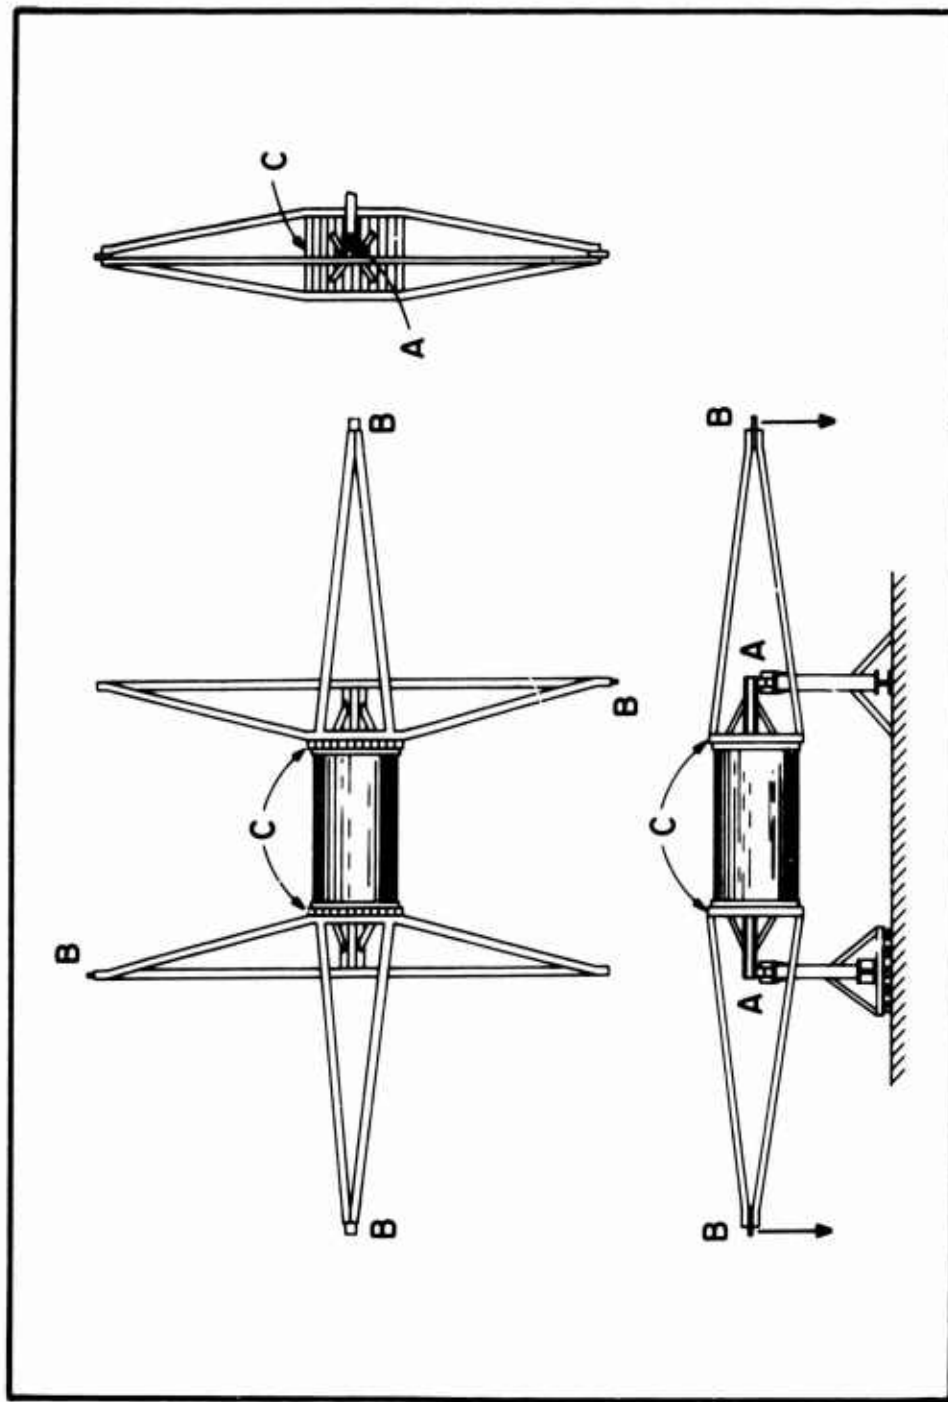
Schematic of 3,000,000 Inch-Pound Torsion-Bending Testing Machine: A, Universal Joints; B, Loading-Arm Cable Connections; C, Specimen Mounting Plates.
